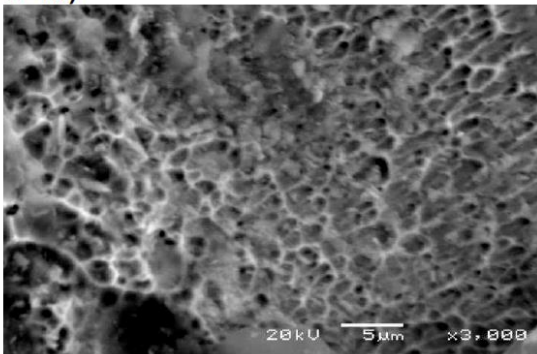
Fractograph showing typical outer strand wire ductile final fracture geometry (x3000, SEM)
